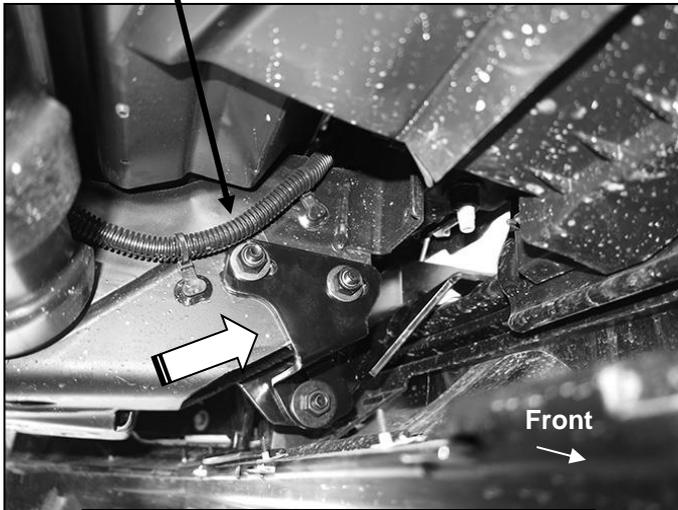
Insert Double Bolt Plate through holes in outer side of frame (arrow)
